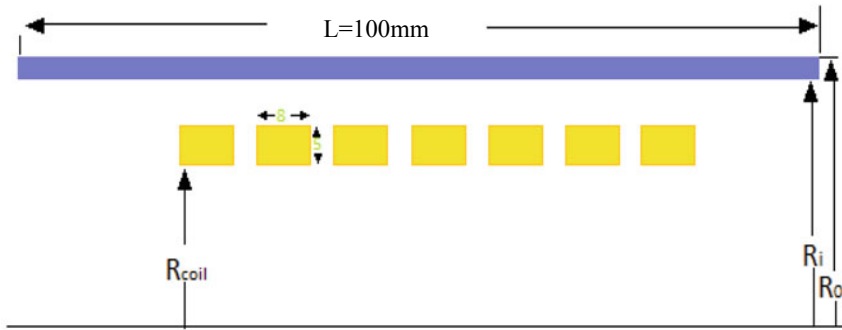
Cross-section of coil and tube (work-piece) in the EMF process
